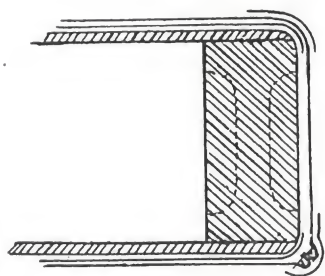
METHOD OF ATTACHING FABRIC TO REAR SPAR
